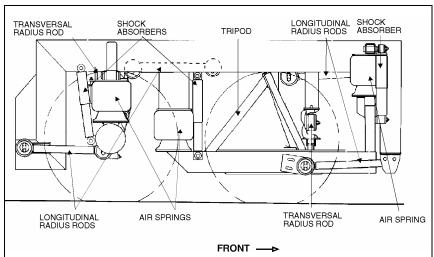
REAR SUSPENSION COMPONENTS 16003
